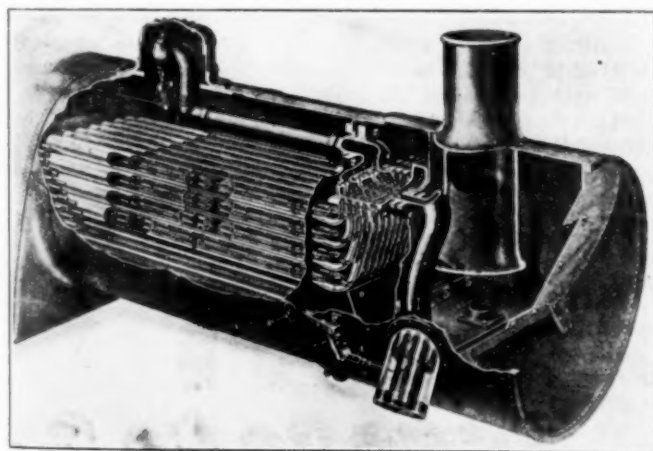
AMERICAN STANDARD LOCOMOTIVE SUPERHEATER, TYPE "A" EQUIPMENT
